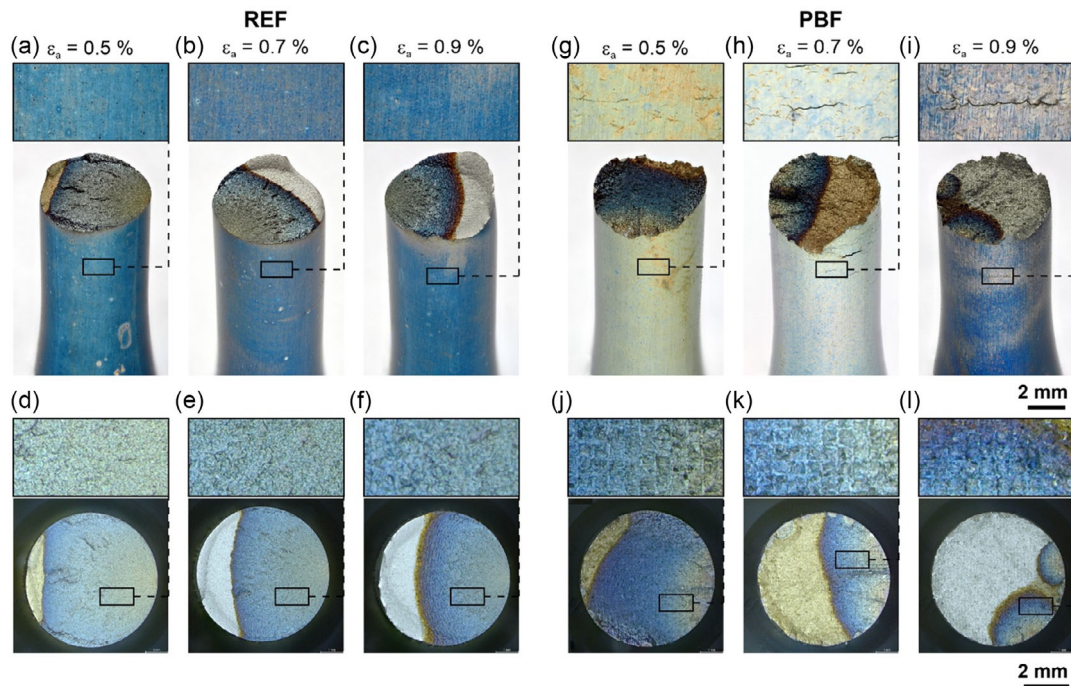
Fracture surfaces of the LCF specimens tested at 650 °C (left REF, right PBF-LB/M). The top row shows photographs of the fractured specimens, the bottom row OM images (top view) of the fracture surfaces (note: in the bottom row, the supposed crack initiation is always on the right and might be rotated to the top row). The small rectangular images on top represent enlarged details.
